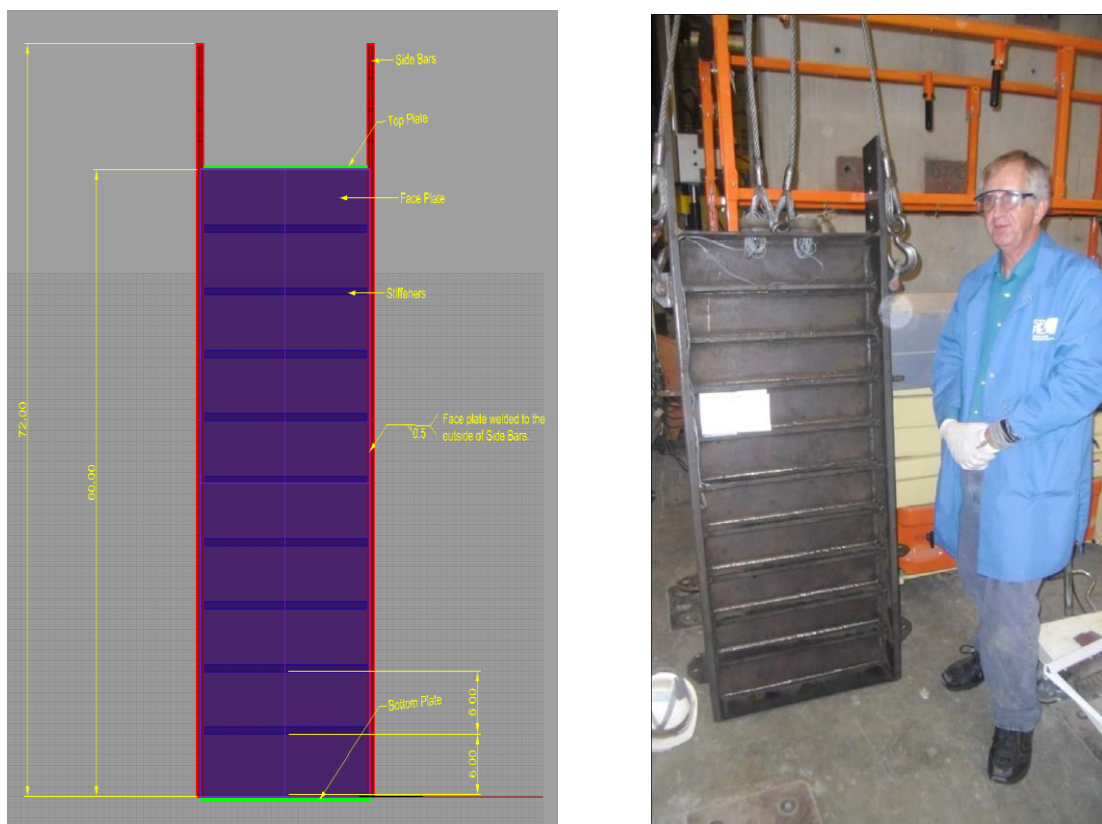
(a) Ice Force Measuring Plate Design, front view. (b) Photograph of the plate during strain gauge installation.
